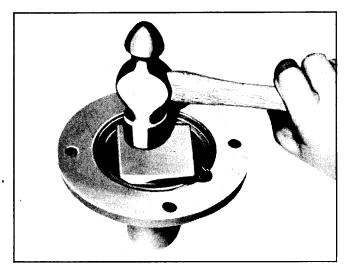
A-28 Installing Main Drive Gear Bearing Retainer Oil Seal
